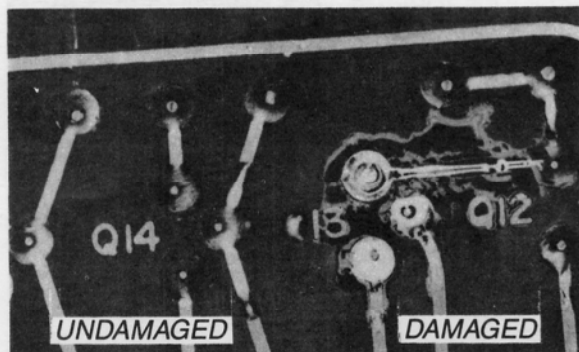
UNDAMAGED AND DAMAGED PRINTED CIRCUIT ASSEMBLIES
